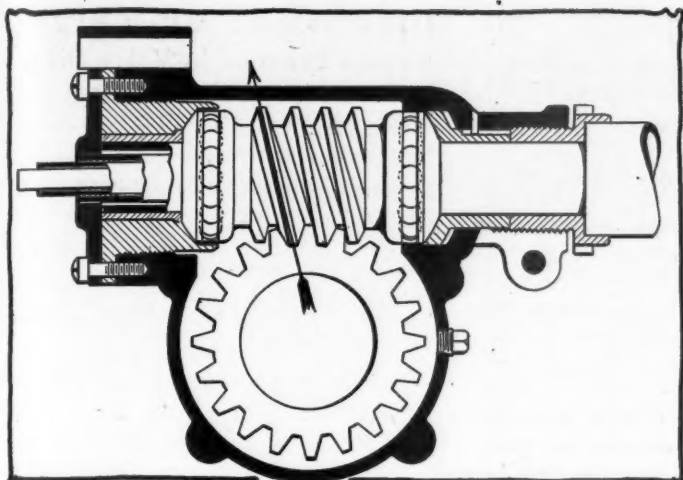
WARNER WORM-AND-GEAR STEERING MECHANISM
